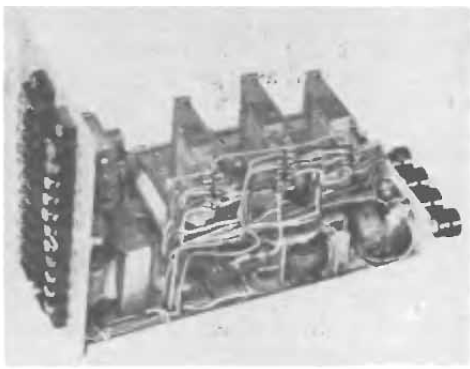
The control box assembly contains the relays and relay power supply as well as the control buttons.
